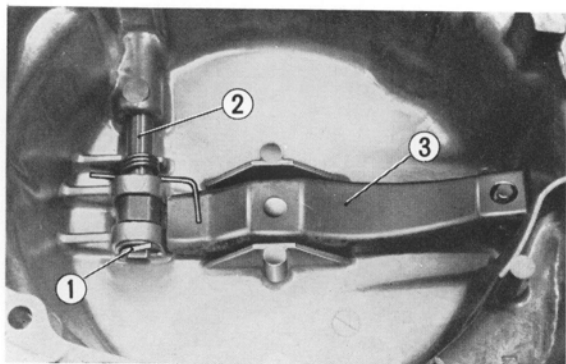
① Cotter pin ③ Clutch adjusting lever
